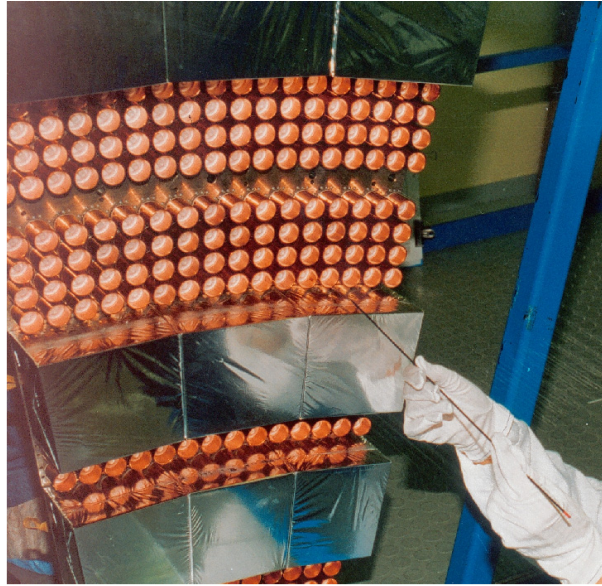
Photography of a petal sector during wiring. The operator passed the needle attached to stainless steel wire through the corresponding hole in the petal.
